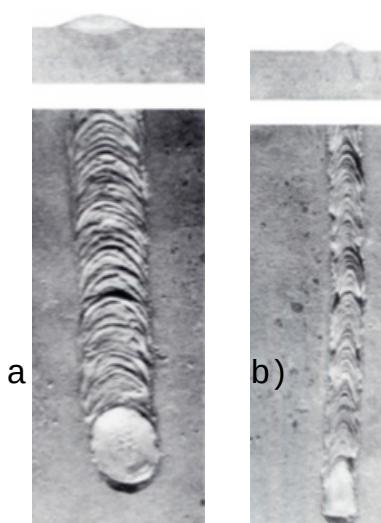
Weld Bead Appearance at Different Speeds
